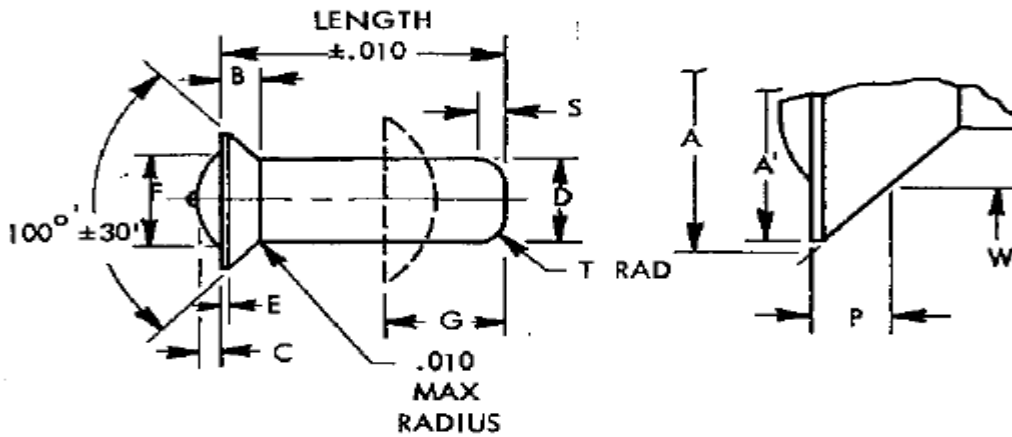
NAS1097DD5 (5/32") Countersinking Head Solid Rivet [3]
